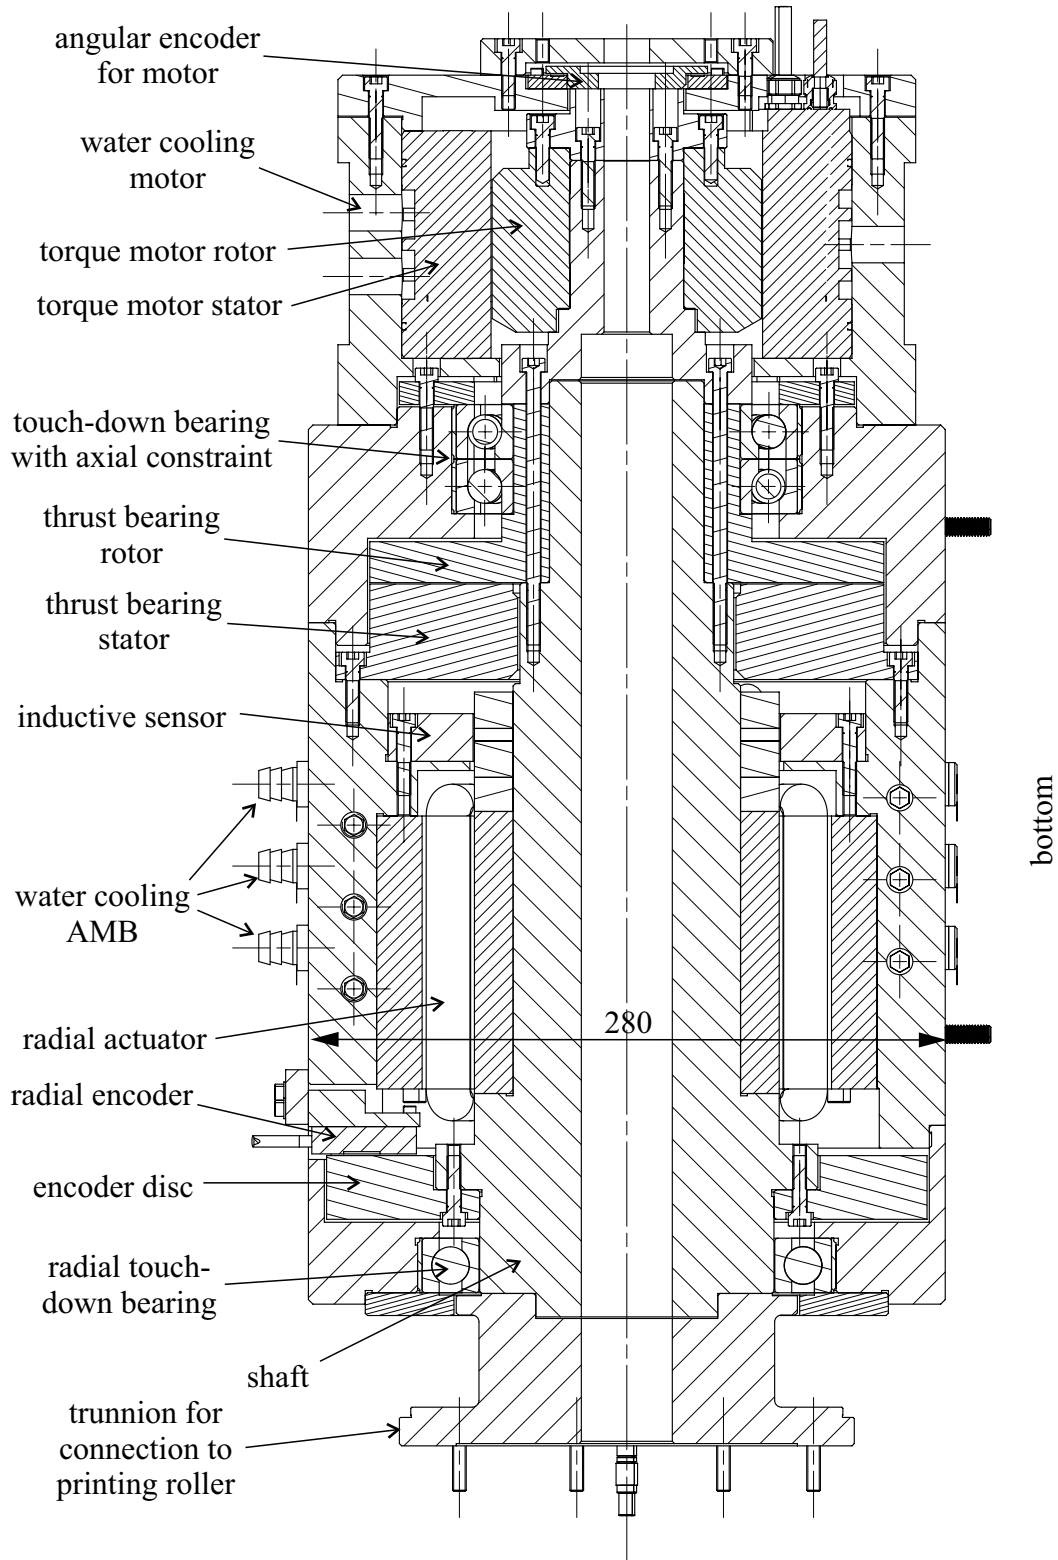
Elevation of magnetic bearing spindle for patterning roller axis
